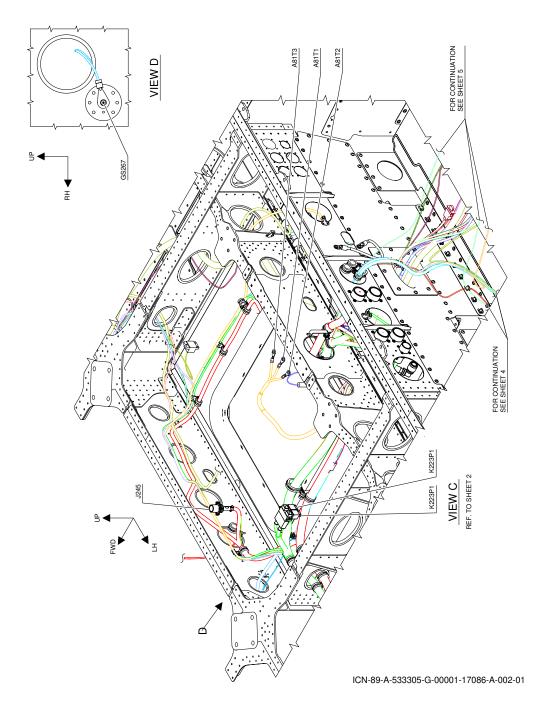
(Sheet 3 of 7) Left BL 550 aft longeron - Electrical parts
